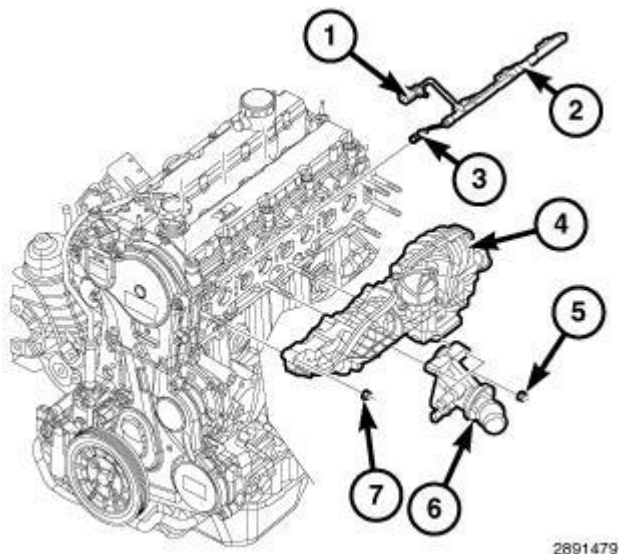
Glow Plug Wire Harness Clip, Wire Harness, Glow Plugs, Intake Manifold, Thermostat Housing & Bolts
